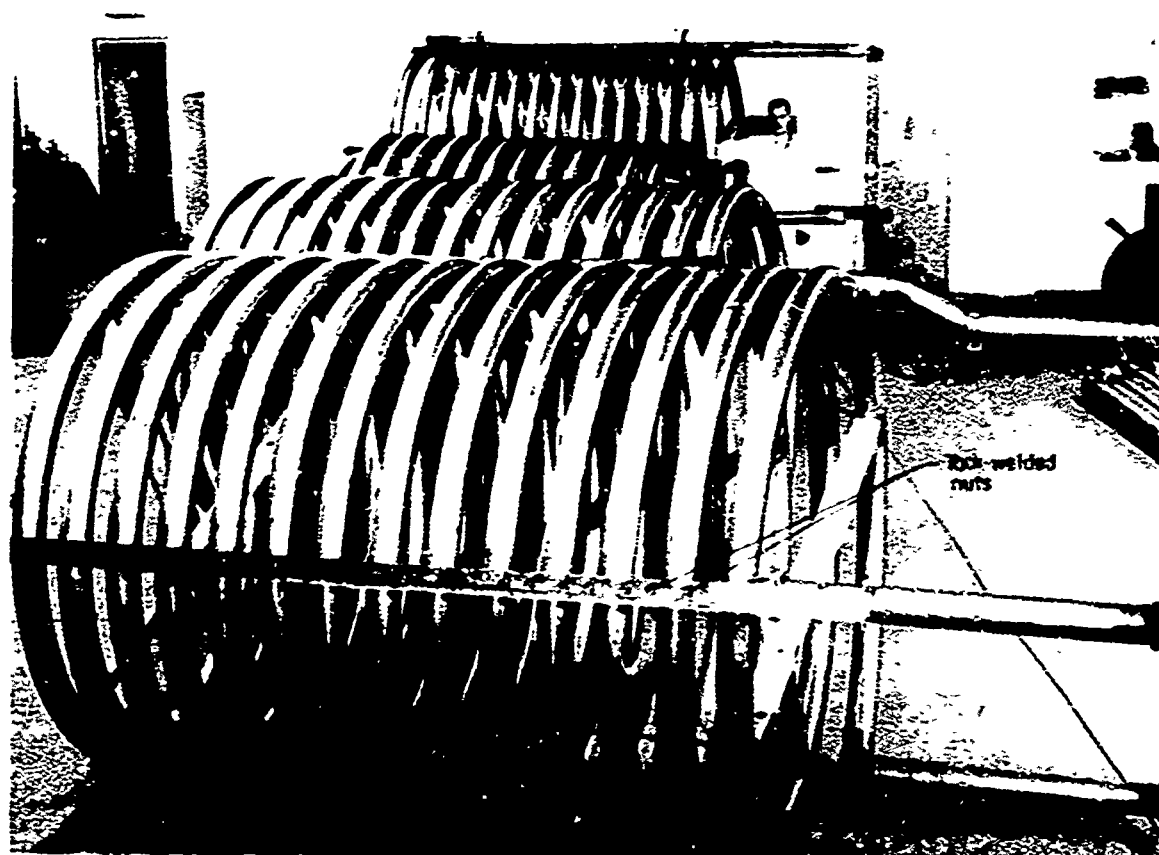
COILS IN VARIOUS STAGES OF COMPLETION SHOWING MECHANICAL SUPPORTS AND TACK-WELDED NUTS (REF. 21)
